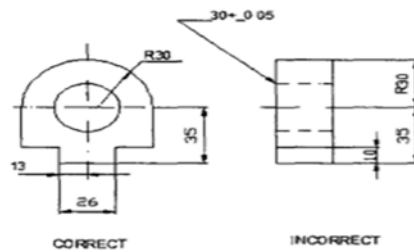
Placing the Dimensions where the Shape is Best Shown
